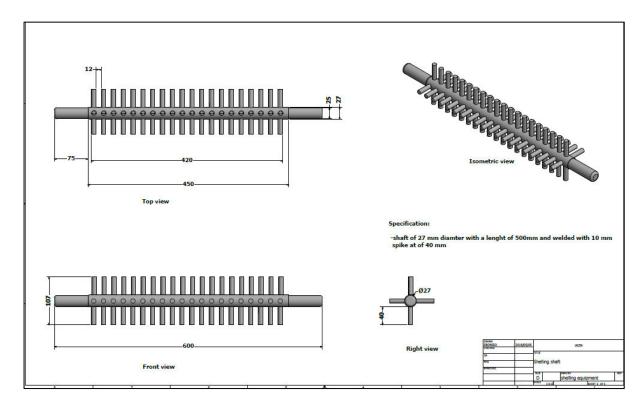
Shelling shaft with welded spikes at 11 mm apart
